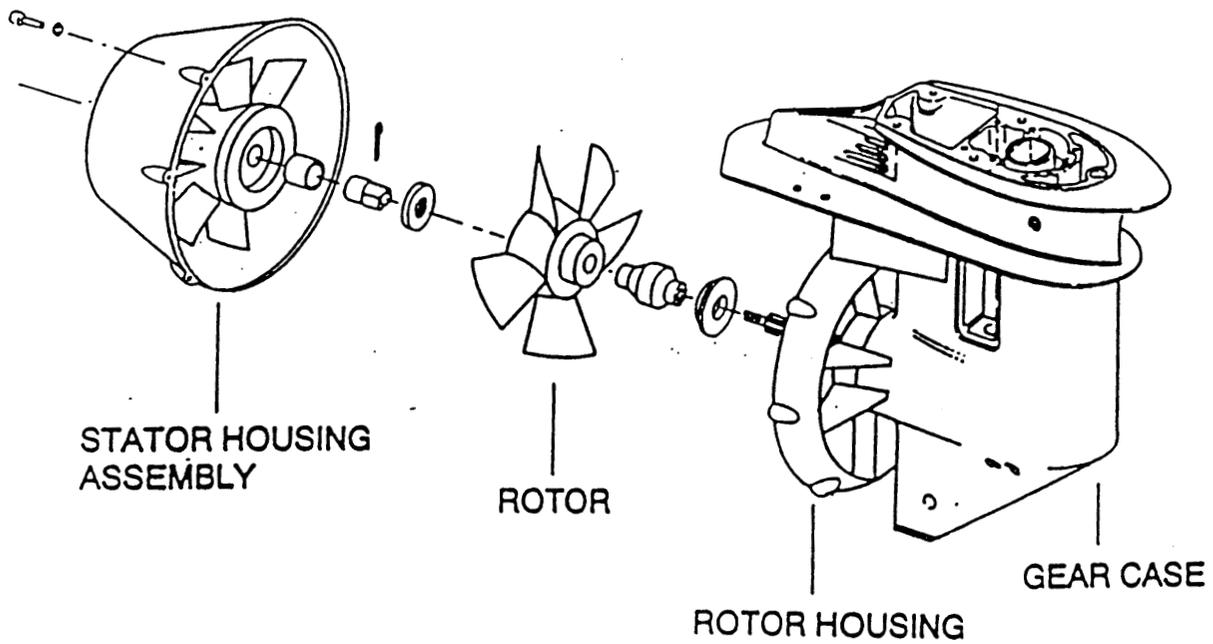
Pump Jet Propulsion Assembly for MARS Motor
